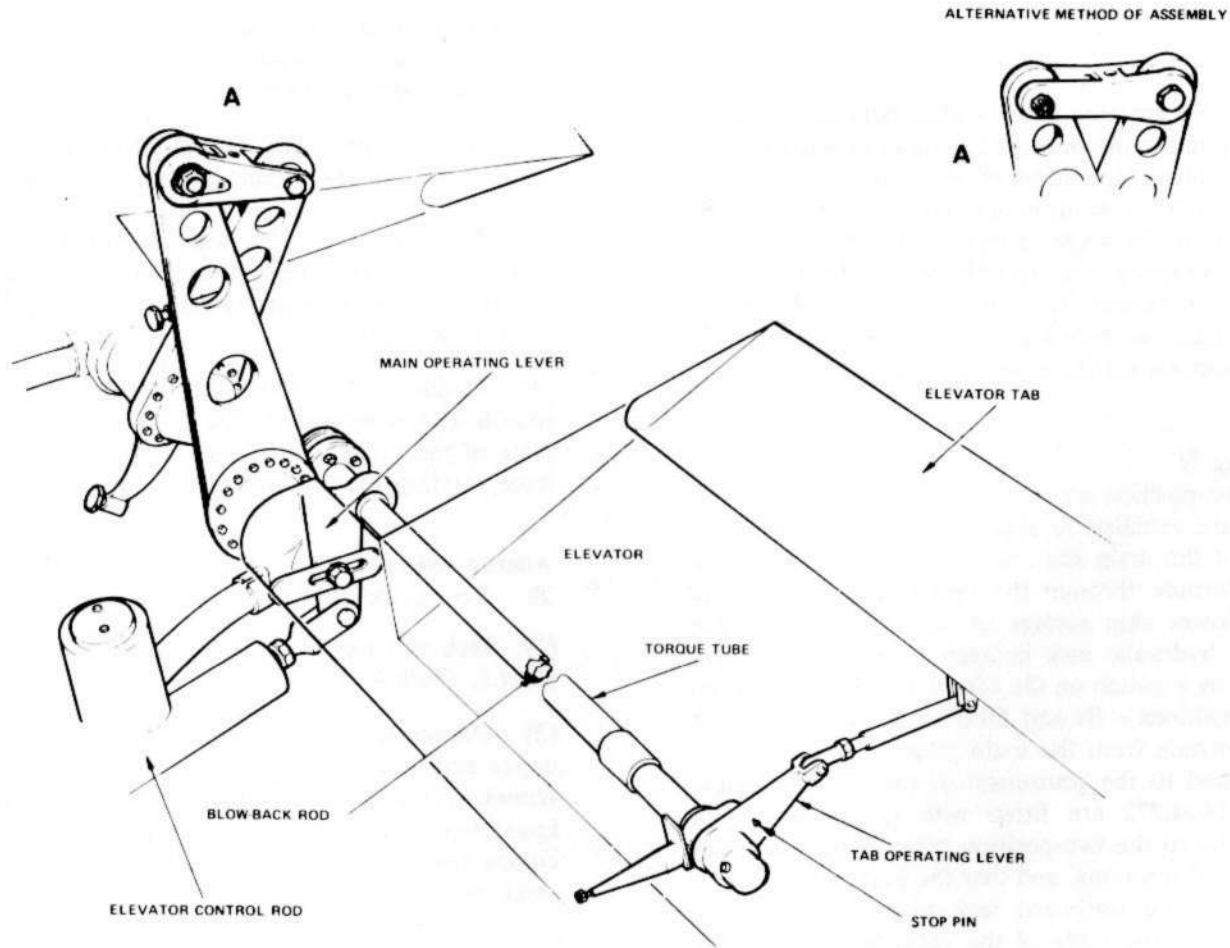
PORT ELEVATOR SPRING TAB MECHANISM
